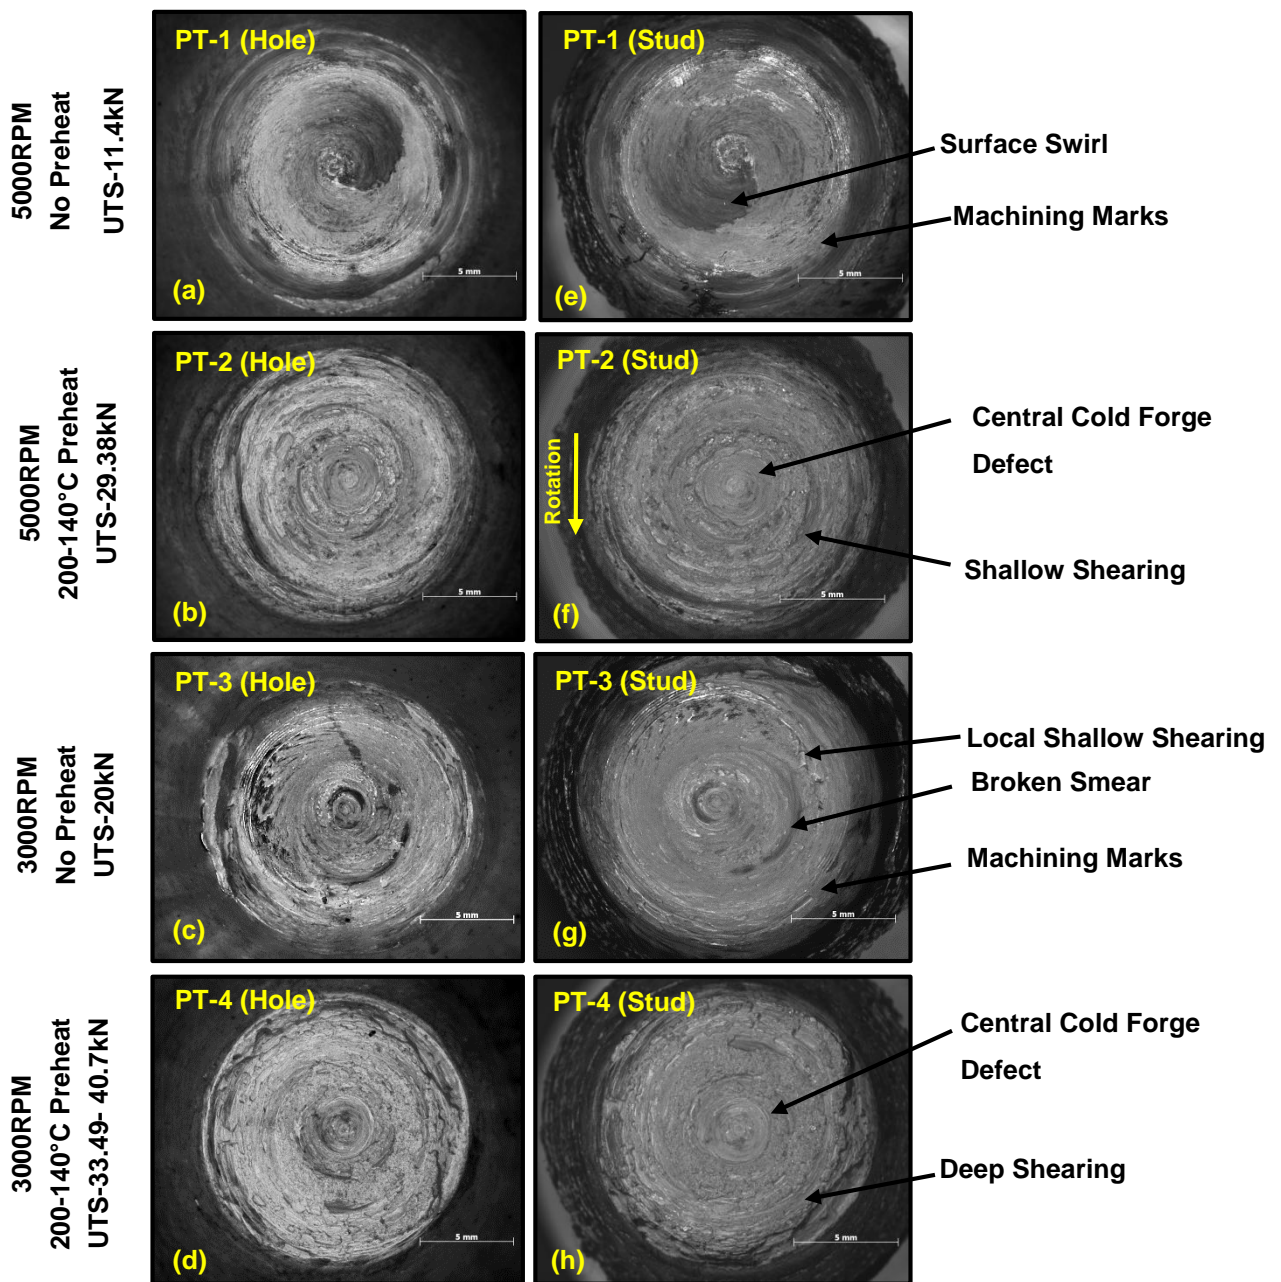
Fracture Macrographs of welds PT-1 to PT-4
